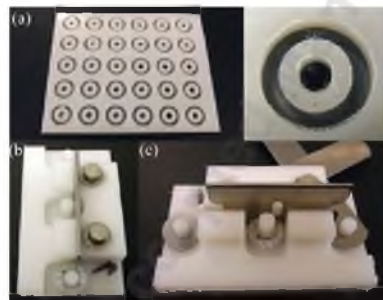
HDPE coupler manufacturing process: (a) Inner circle, outer circle and spike holes are machined using a CNC. (b) The through side cuts of the wing are made. (c) The blind center cuts of the wing are made.
